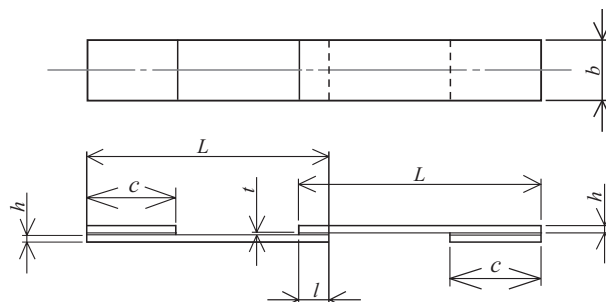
Dimensions and geometry of adhesive bonded single-lap joint.
